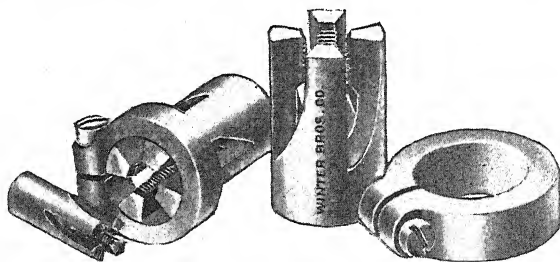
Spring Screw-Threading Dies for Machine Use.
